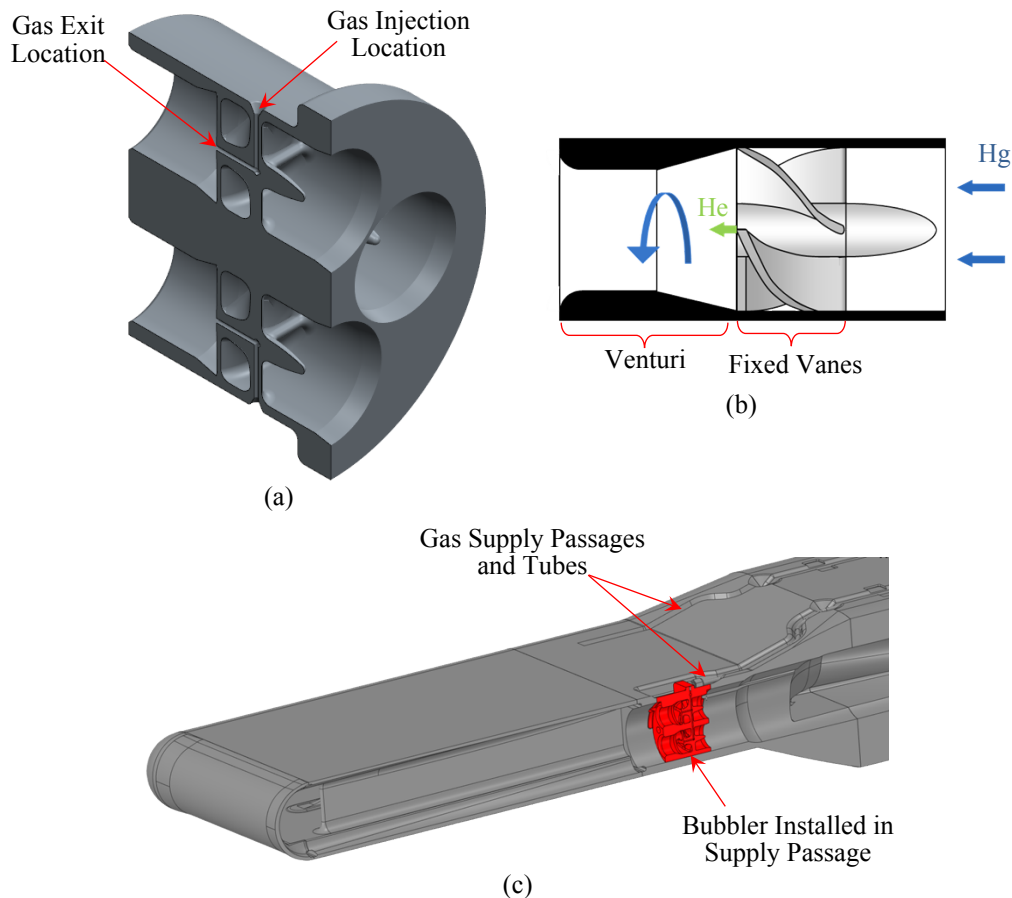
(a) Cross-sectional view of a swirl bubbler assembly, (b) diagram showing the flow pathway through the bubbler, and (c) cross-sectional view of bubbler assembly installed in a target.
